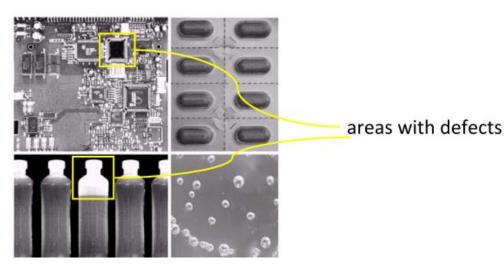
5 : Examples of industrial inspection for defective products (Zhang,2013)
